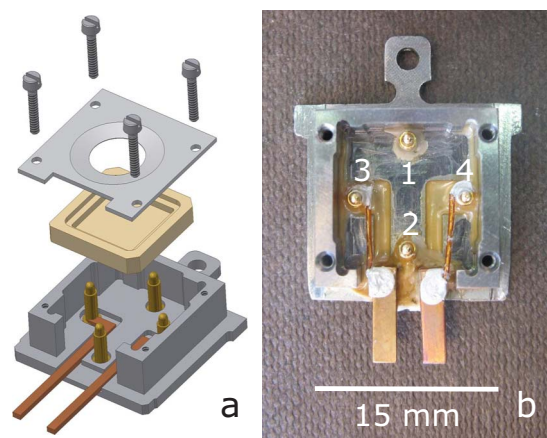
(Color online) Drawing (a) and photograph (b) of the sample holder comprising the sample plate with spring contacts, chip carrier, and mask.
